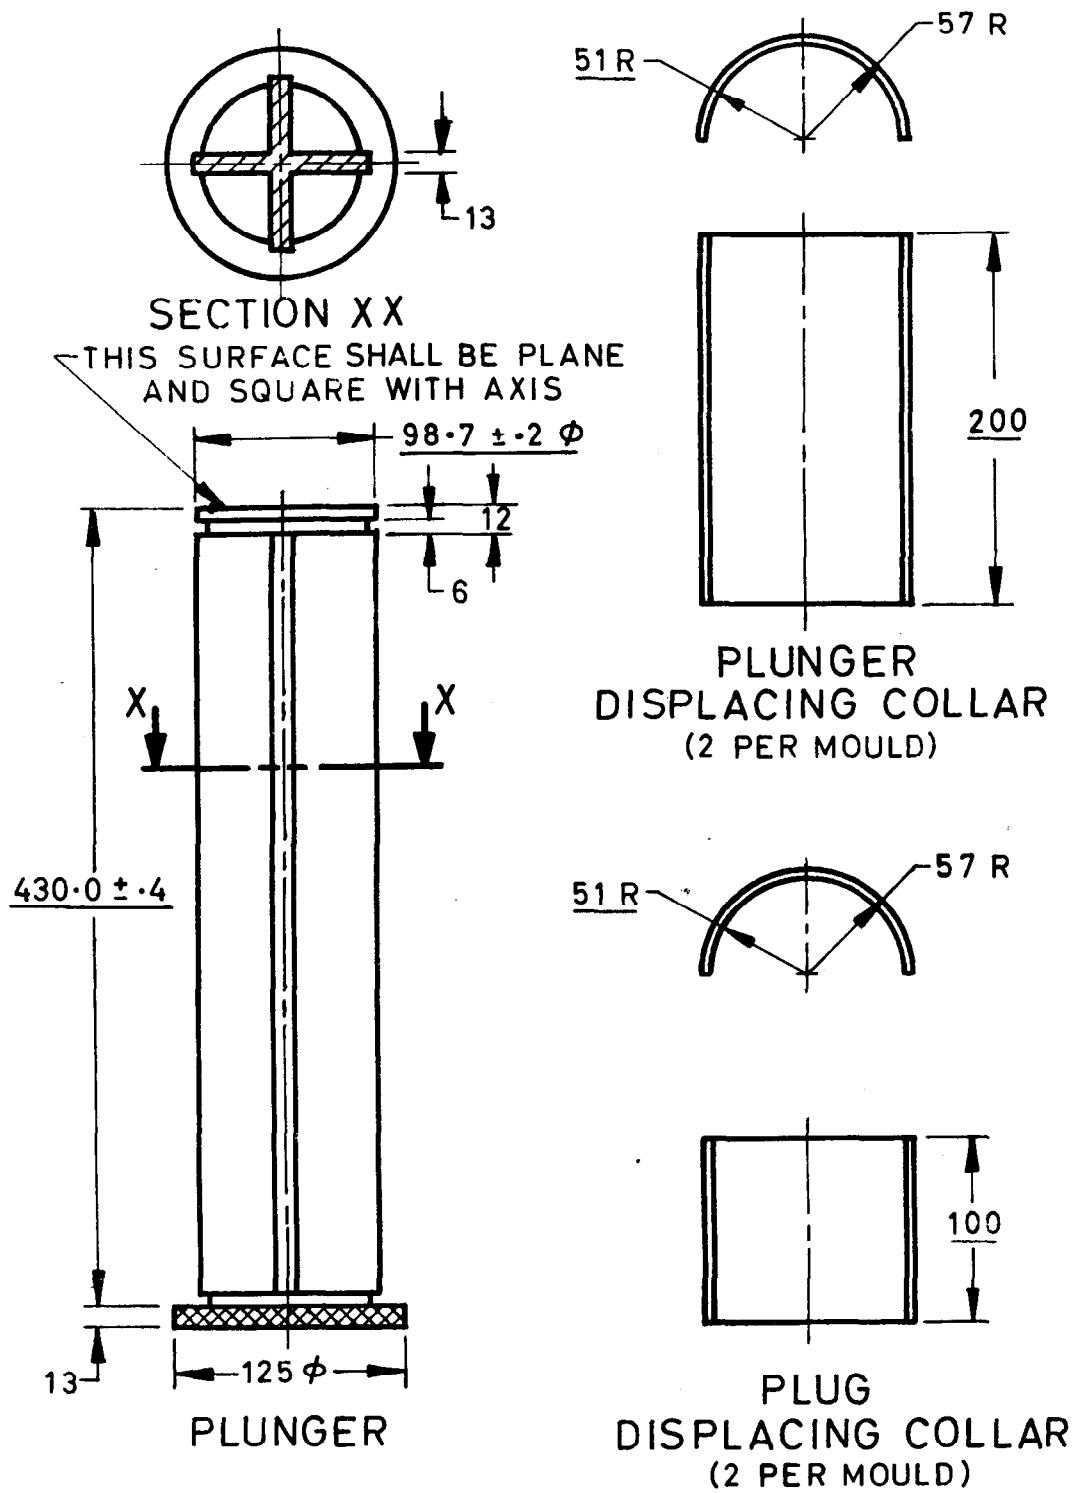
PLUNGER AND DISPLACING COLLAR FOR USE WITH TAPERED CYLINDRICAL MOULD SHOWN IN FIG. 1
